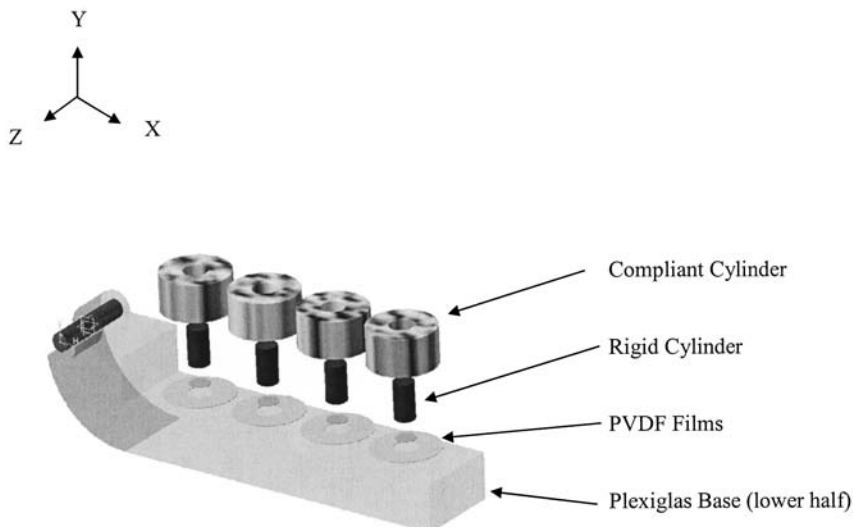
Exploded illustration of the two-concentric-cylinder tactile sensors.
